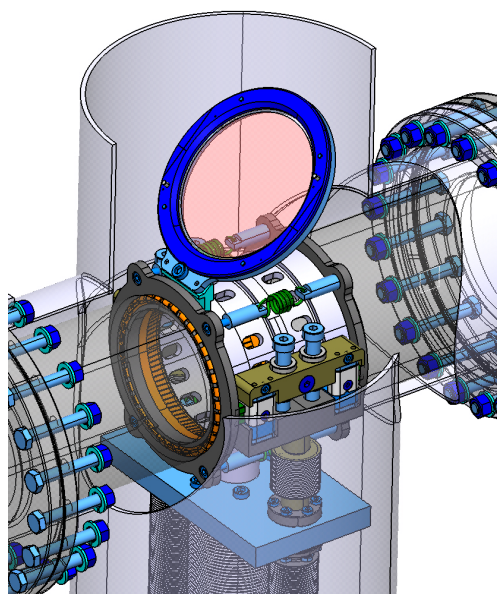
Drawing of the viewer. A scintillator screen is moved into the beam with 45°. While being moved out, a RF cage will be moved into it's position.
